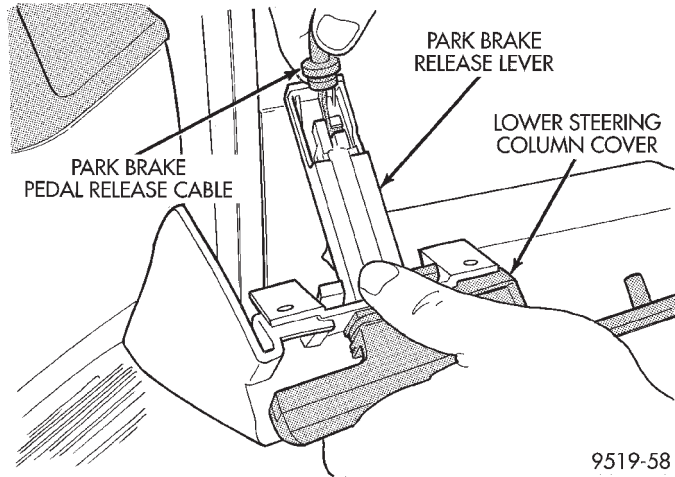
Park Brake Release Cable Attachment To Release Lever
